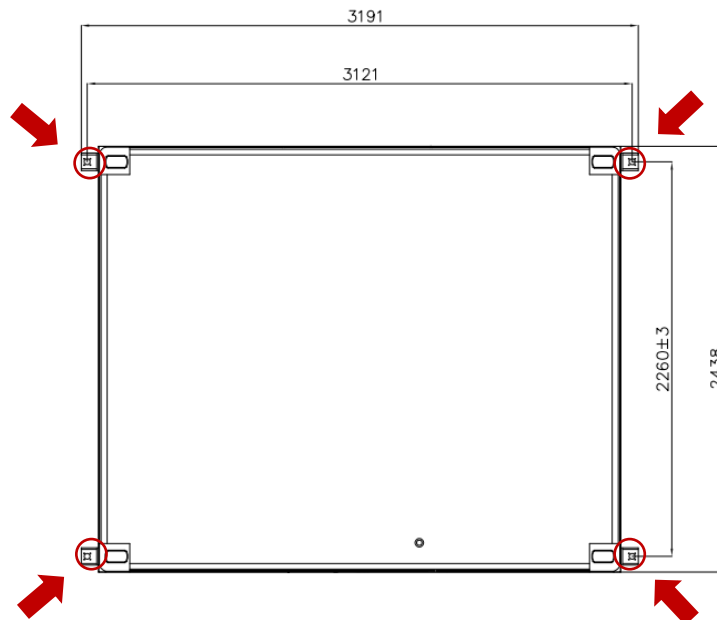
Cabinet fixation guide bottom view Unit: mm
